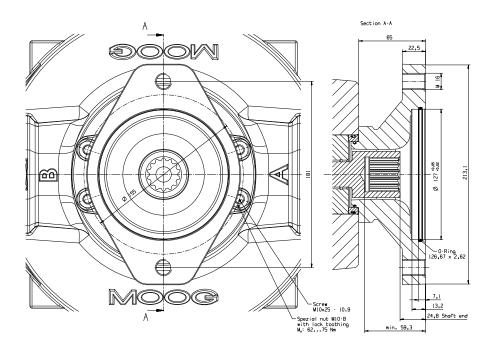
Adapter flange SAE-C with 14-tooth shaft
